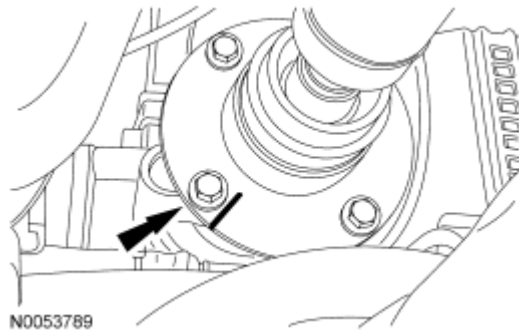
Identifying Front Driveshaft-To-Transfer Case Bolts & Index Mark
